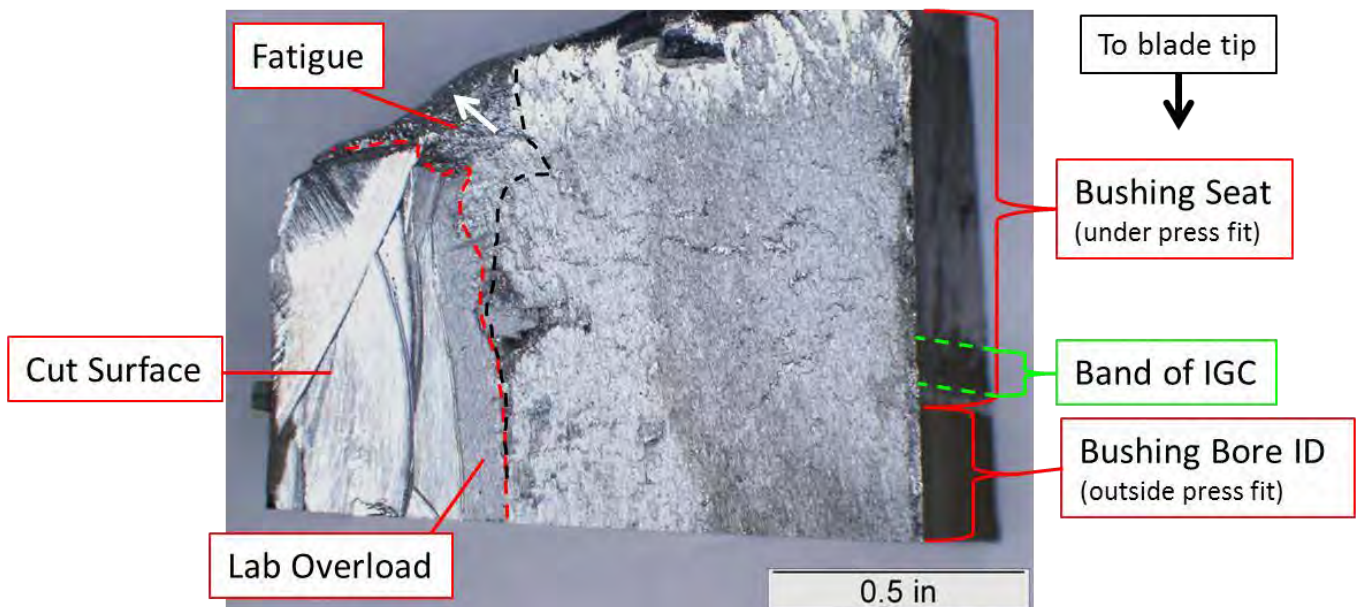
Initiation and propagation of circumferential fatigue crack from intergranular radial crack.
